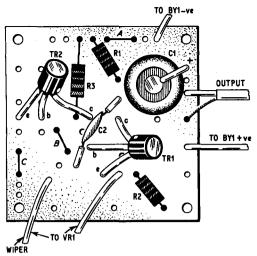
Layout of components on the printed circuit board. Link wires are required at A, B, and C
